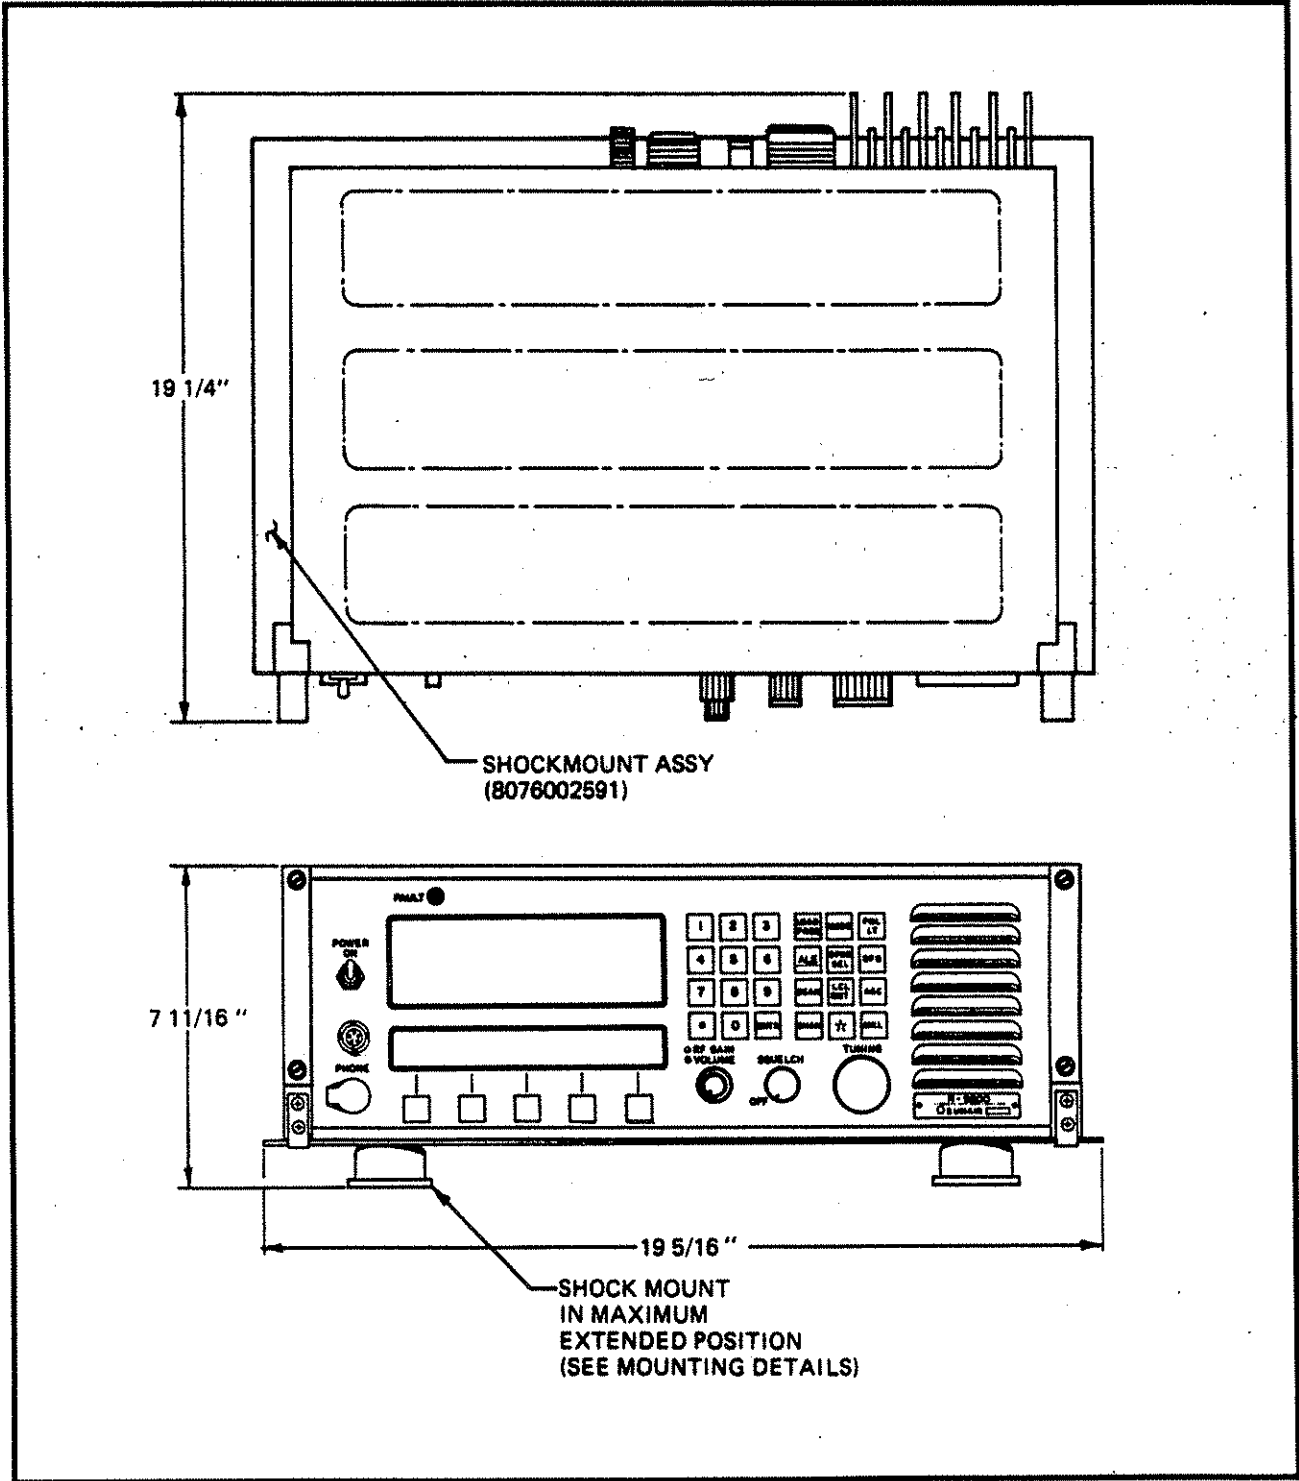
Outline Dimensions of R-9200 with Shockmount.
